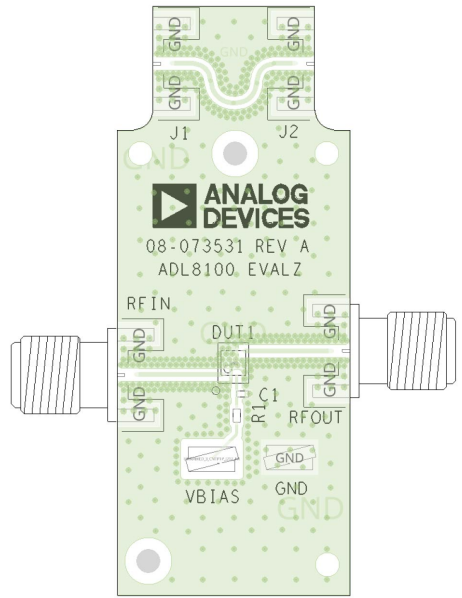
ADL8100ACPZN-EVALZ Assembly Drawing (J1 and J2 Not Installed)
